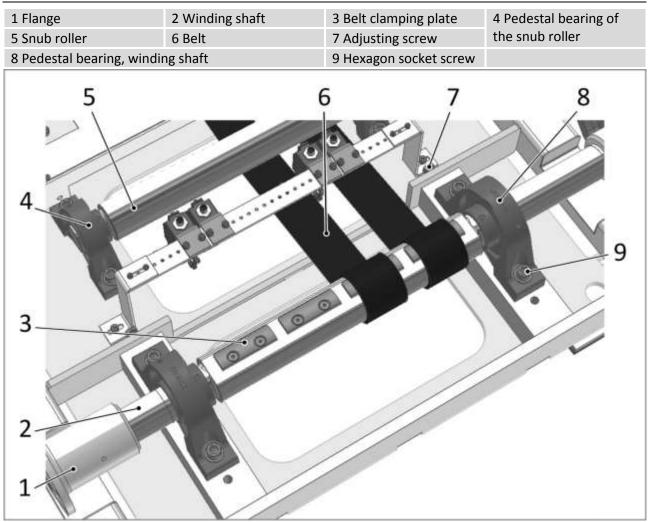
Winding shaft and snub roller (not installied in every lift table)
